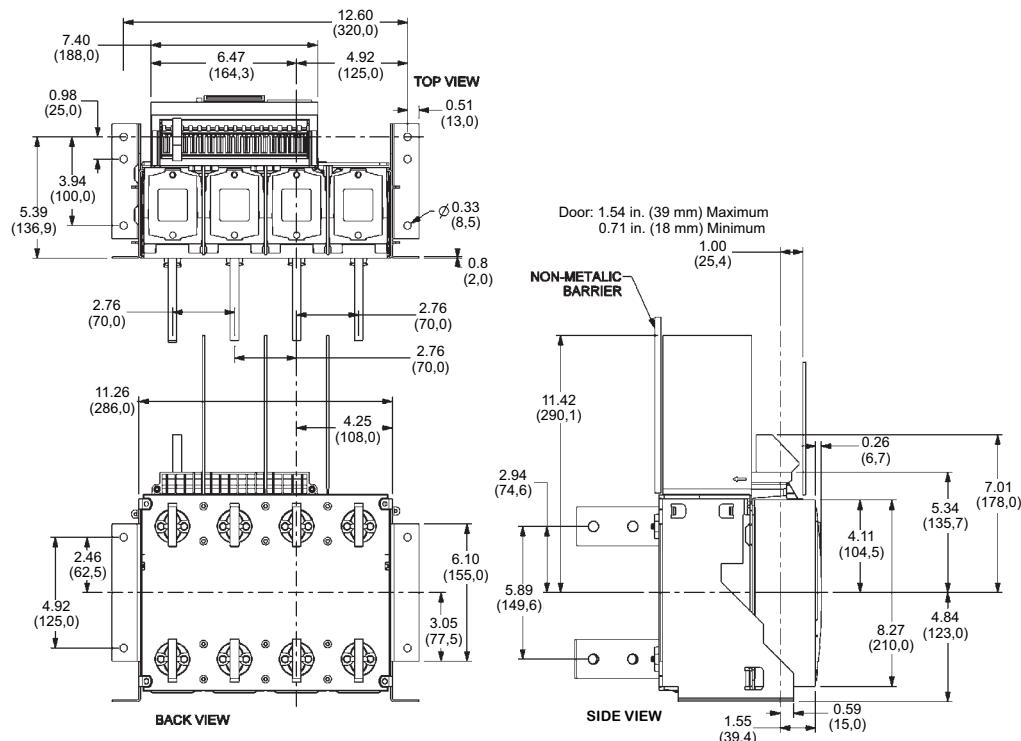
800-1600 A MasterPact NT IEC Four-Pole Drawout—RCTH Rear-Connected “T” HorizontalDimensions: in (mm)
